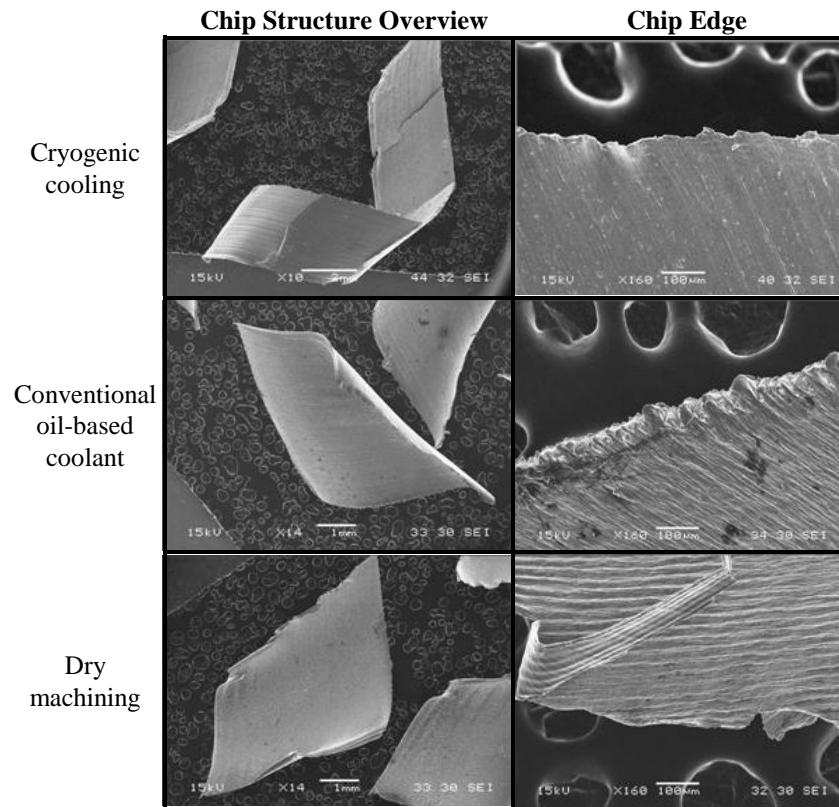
SEM pictures of machined chips produced under a) Cryogenic; b) Wet; c) Dry environments (S= 5000rpm, f= 90mm/min)
